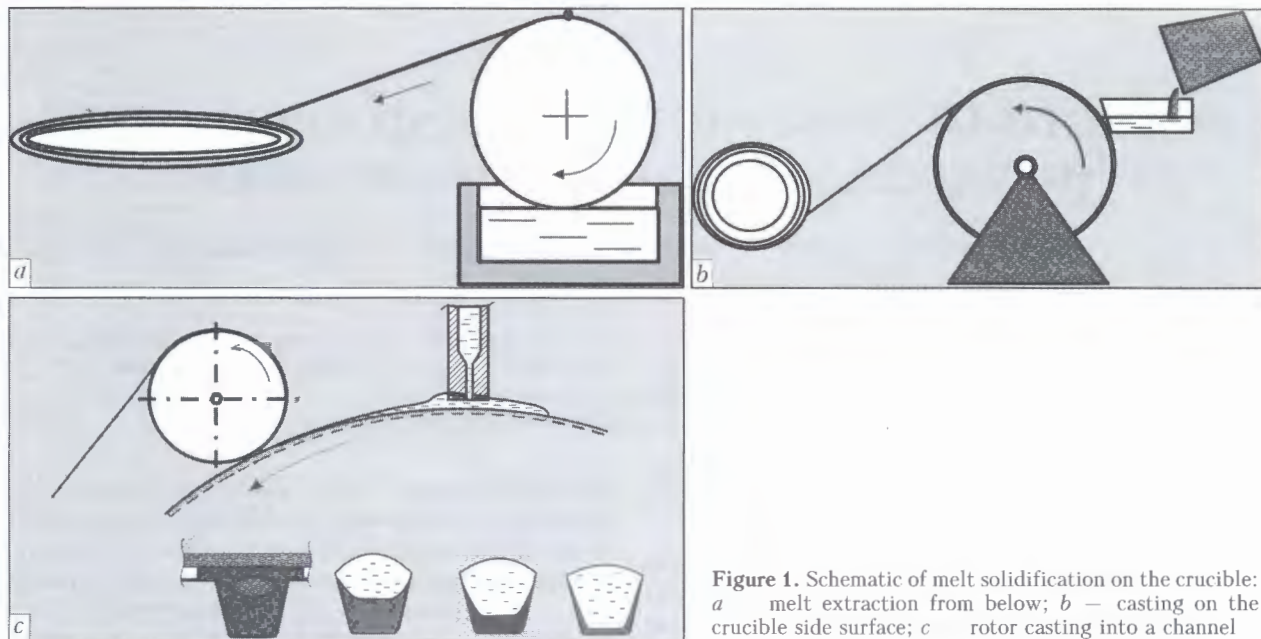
Schematic of melt solidification on the crucible: *a* — melt extraction from below; *b* — casting on the crucible side surface; *c* — rotor casting into a channel
